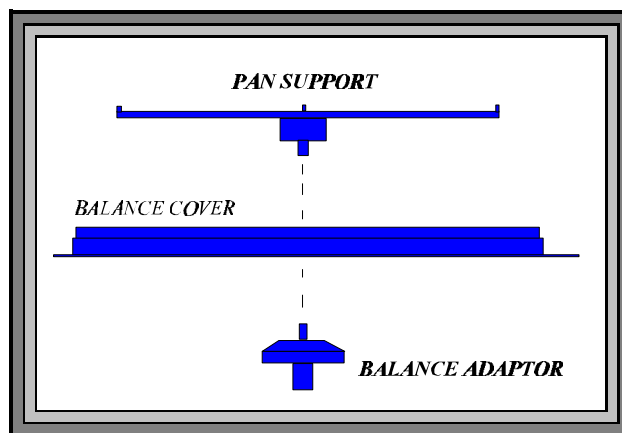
ADAPTOR/SUPPORT ASSEMBLY
